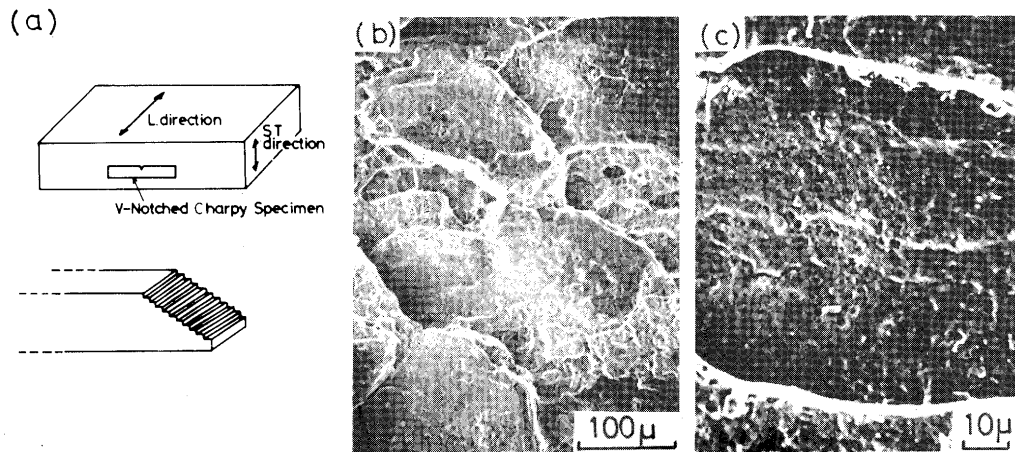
Fractographs showing intergranular fracture for the specimen fractured at -196°C and then immersed in 3.5% NaCl + 0.5% H_2O_2 solution for 24 hours.
